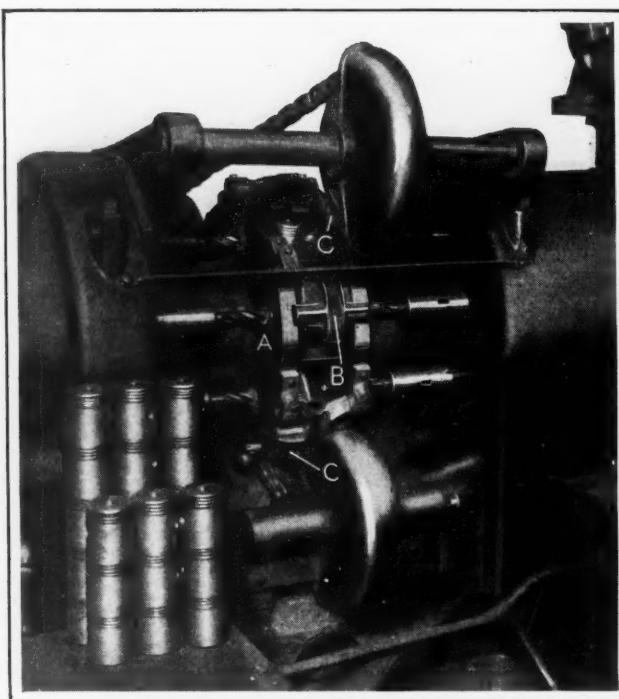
Drilling Both Piston-pin Holes in a Machine Equipped with Continuously Revolving Work-carrier and Spindle Housings
